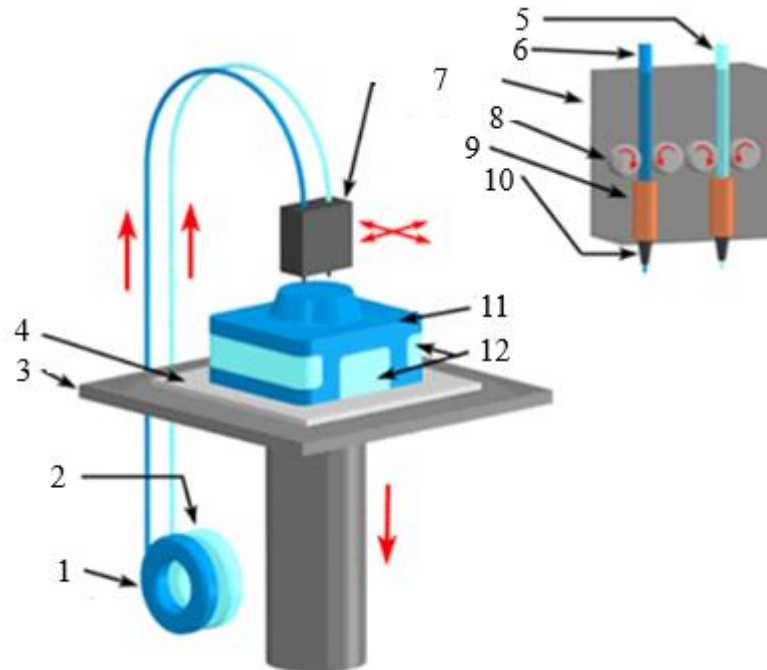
Schematic diagram of an FDM 3D printer [14]: 1-printing part material roll; 2-roll support material; 3-printing platform; 4-foam base; 5-support filament; 6-filament for part; 7-extrusion head; 8-drive wheels; 9-liquefier; 10-extrusion nozzle; 11-printed part; 12-support printed part
